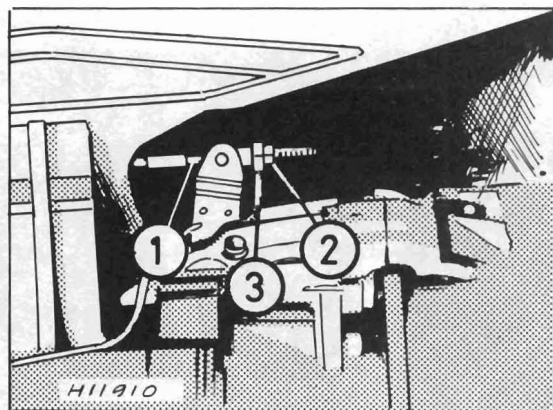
Handbrake cable (1), locknut (2) and adjuster nut (3) (Sec 16)
